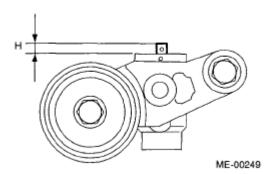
Identifying Adjuster Rod Protrusion Height Courtesy of SUBARU OF AMERICA, INC.
